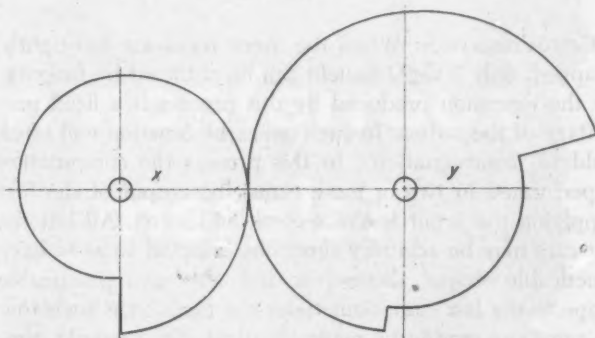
Tape wheels or noncircular gears, in which rolling contact is maintained between the pitch surfaces
